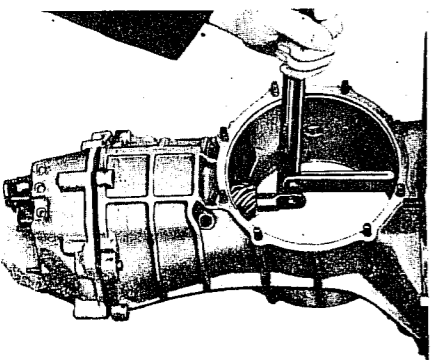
Pressing out the gear train and gear carrier. (A wooden block and levers can be used instead of the tool shown.)
